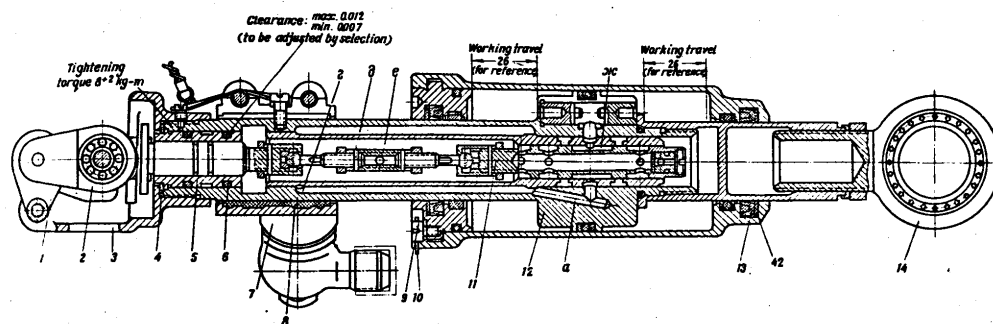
Hydraulic Boosters BV-IV and BV-IM Assembly Drawing
